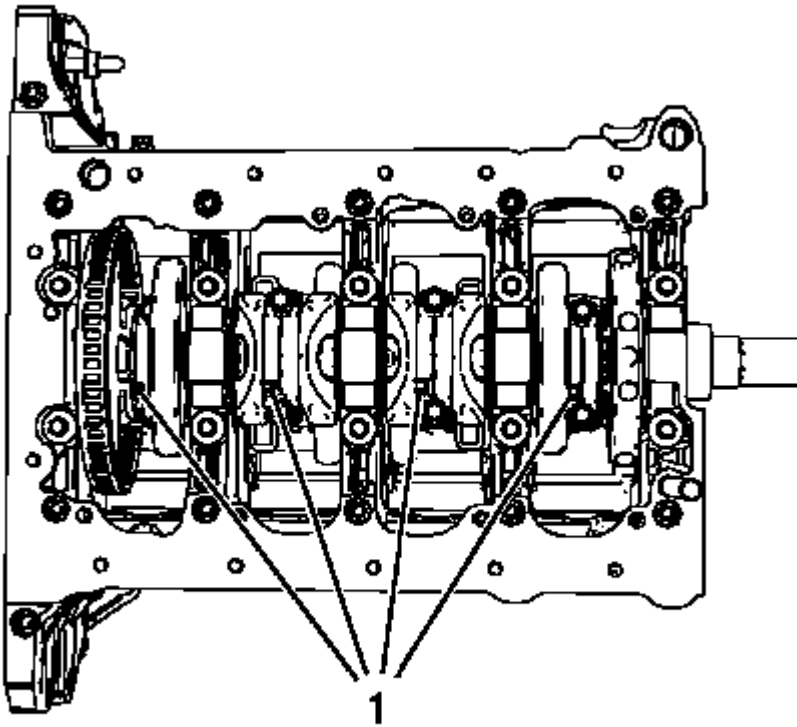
Ensuring Connecting Rod Bearing Caps Point To Transmission Side
